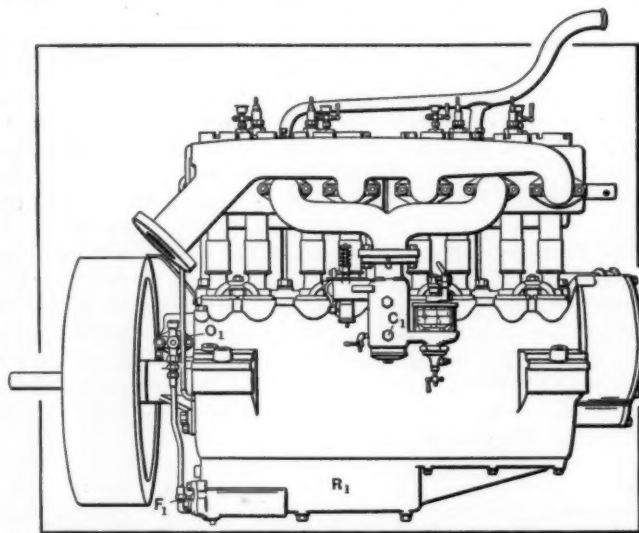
Right side of the Model "40" motor, showing the Stromberg carburetor and the location of the oil pump
